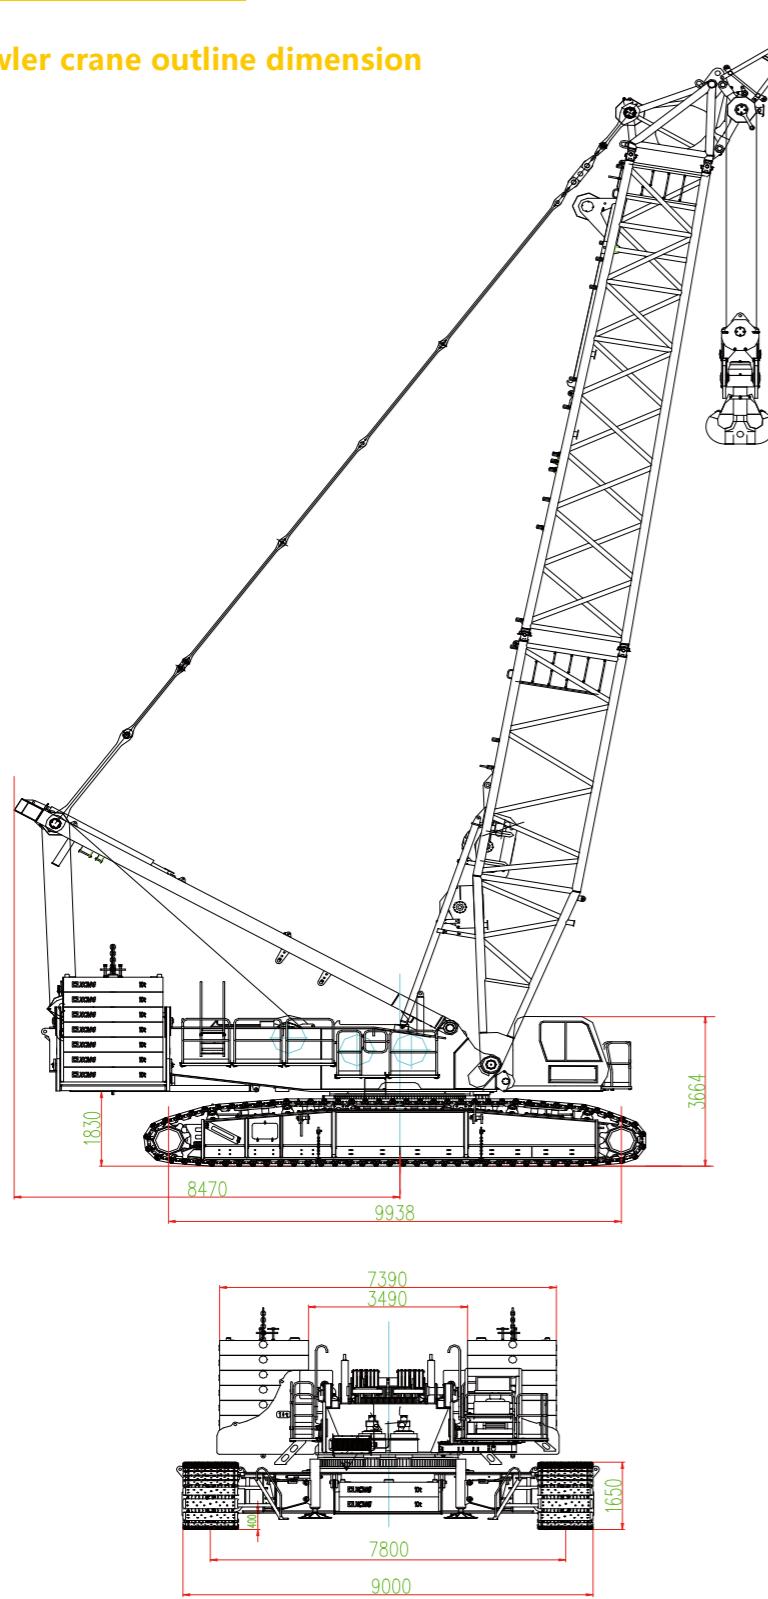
XGC500A crawler crane outline dimension (standard working condition)
